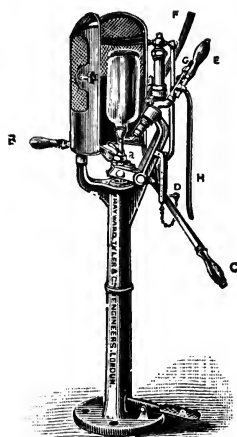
Hayward-Tyler's Syphon-Filling Machine.
